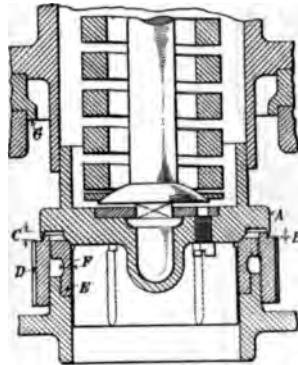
MODIFIED SAFETY VALVE OF TYPE 3
